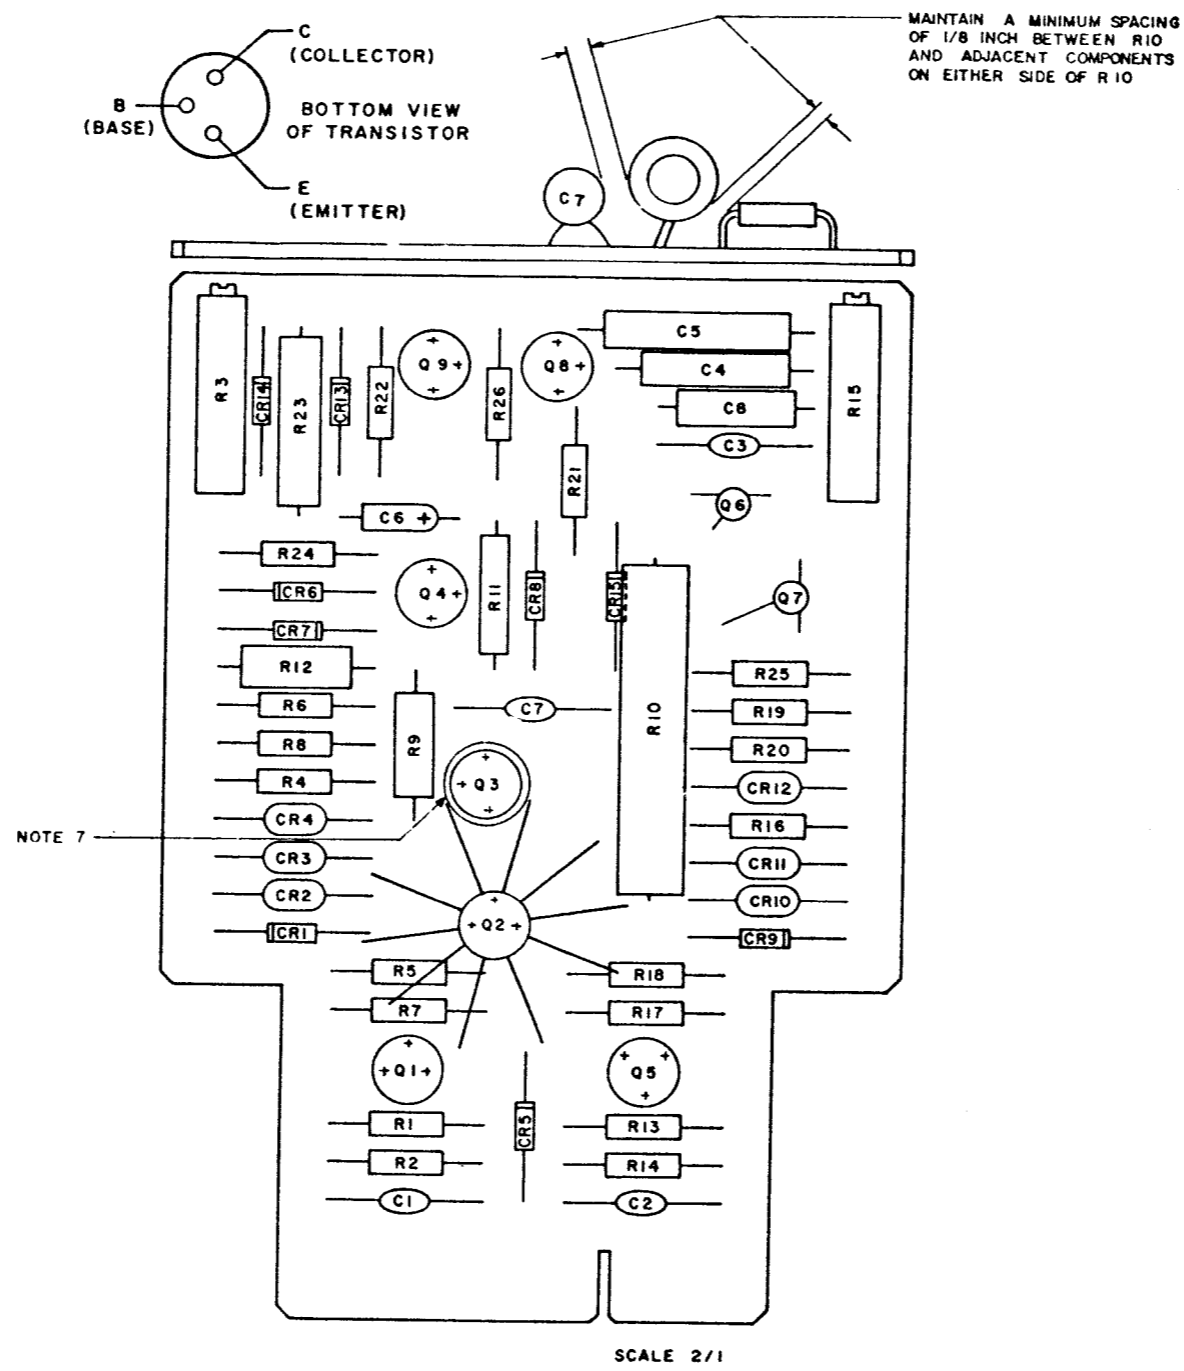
Circuit Board Assembly; Model 28 CPP KSR and RO ESA Power Supply (47 - 53 VDC, 0.5 Amp Max) (Sheet 2 of 2)
